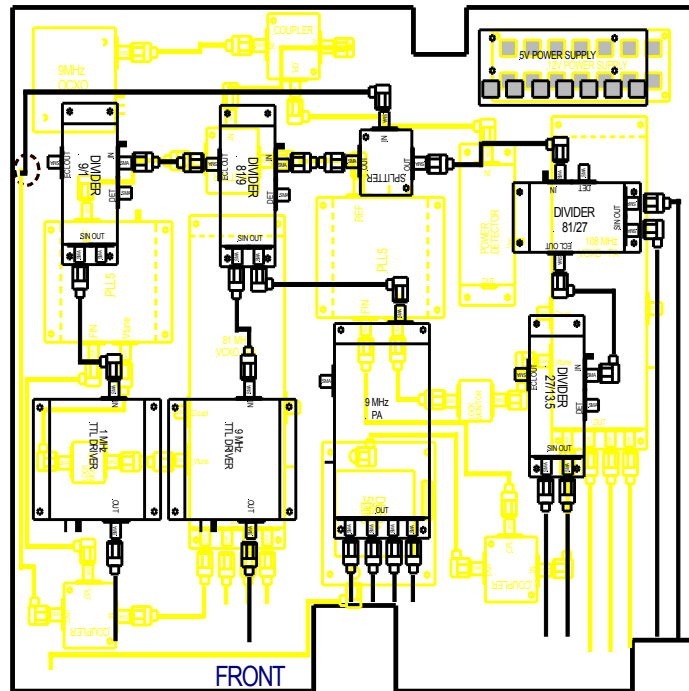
LPP chassis assembly drawing - bottom side, view from the top
